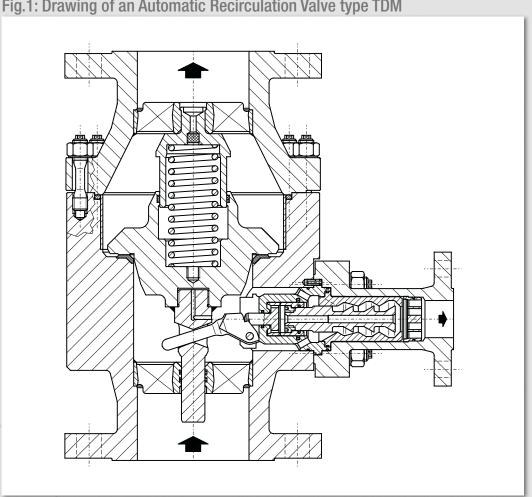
Drawing of an Automatic Recirculation Valve type TDM
